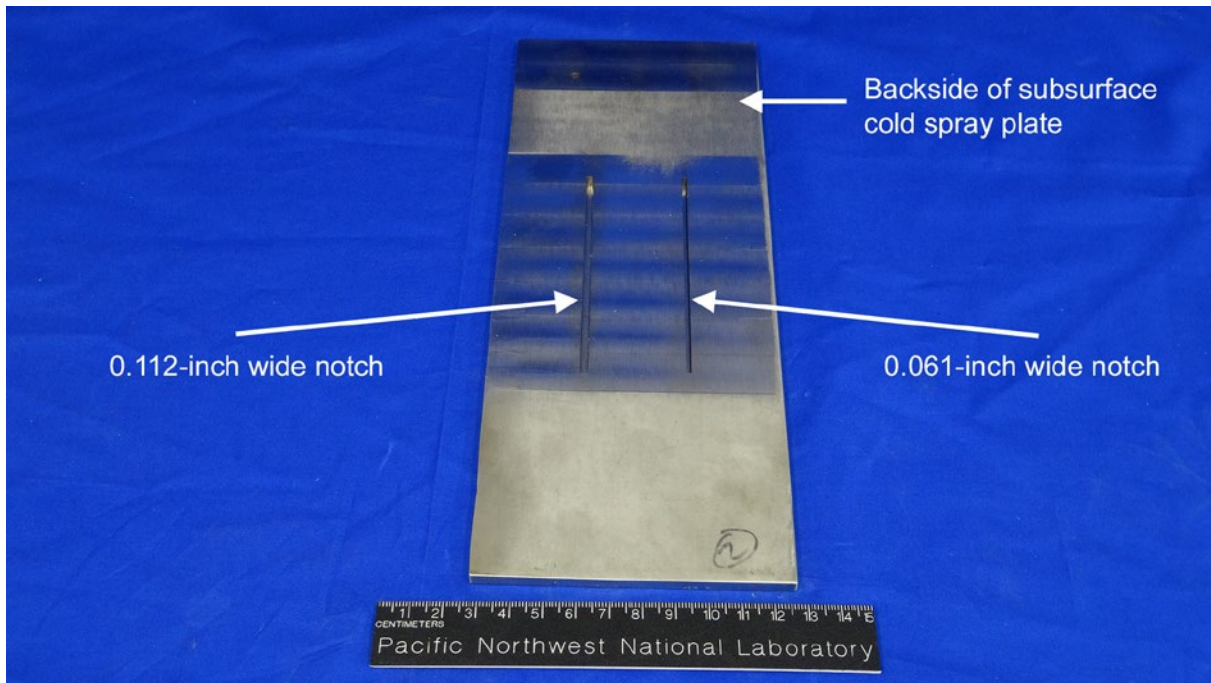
Stainless Steel Subsurface Flaw Plate with Two Machined Notches from the Backside to Represent Subsurface Flaws. Inconel cold spray was applied to the front surface resulting in one of the notches breaking through to the front surface.
